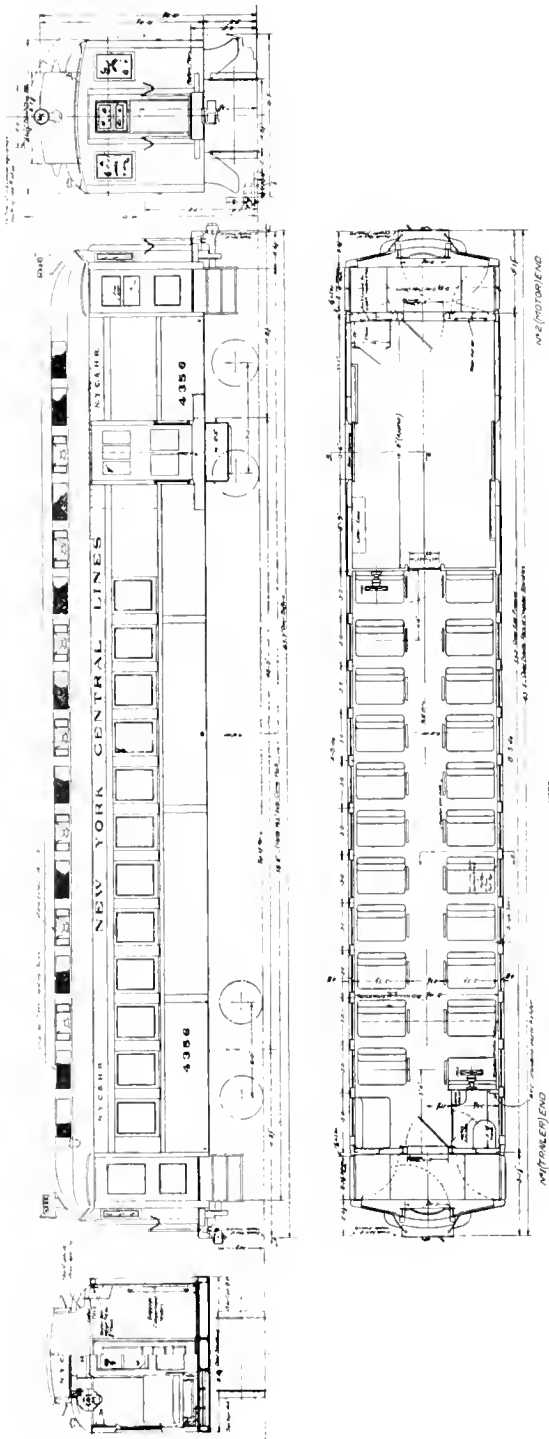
Drawing of the Latest Type of All-Steel Combination Smoker and Baggage Motor Car
